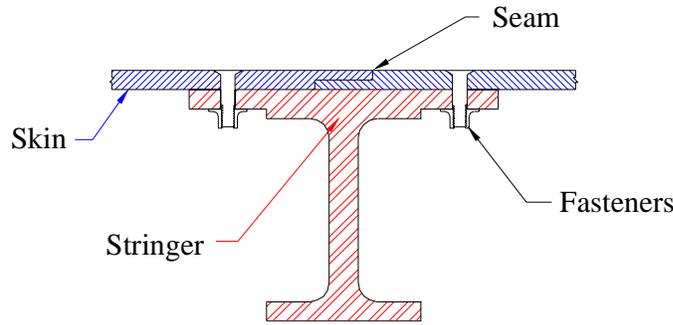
Aircraft Skin Assembly, Fasteners with Stringer.
